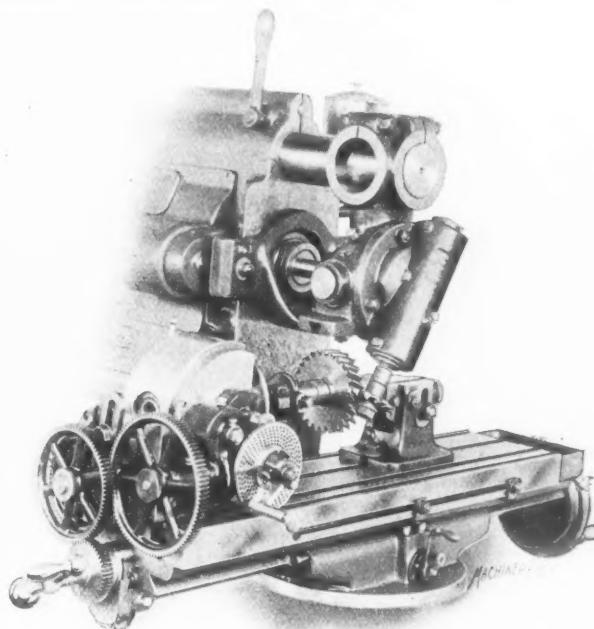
Brown & Sharpe Milling Machine arranged in the Usual Manner for Cutting Spiral Gears.
